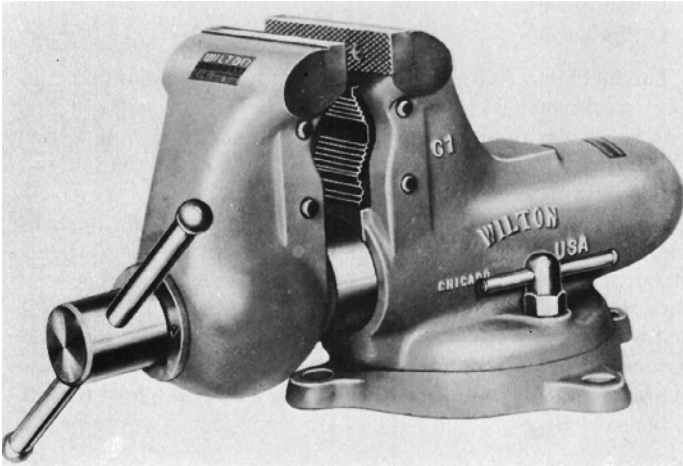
Combination vise. The inner teeth are for holding either pipe or round stock. (Courtesy Wilton Tool Mfg. Co.)
